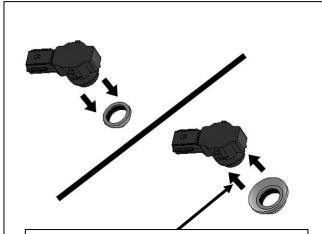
Slide sensor into sleeve, insert Foam Spacer and Clip to lock sensor in sleeve
